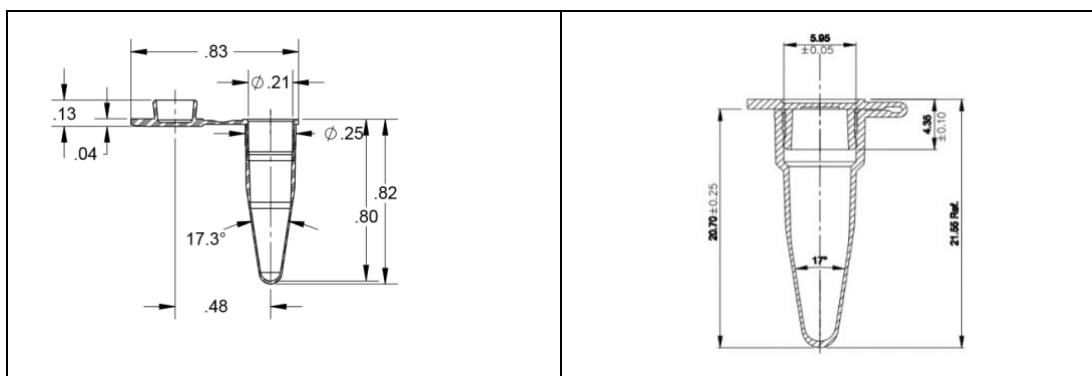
pixl™ Real-Time PCR Platform compatible PCR tube dimensions in English (left) and Metric (right) units.
